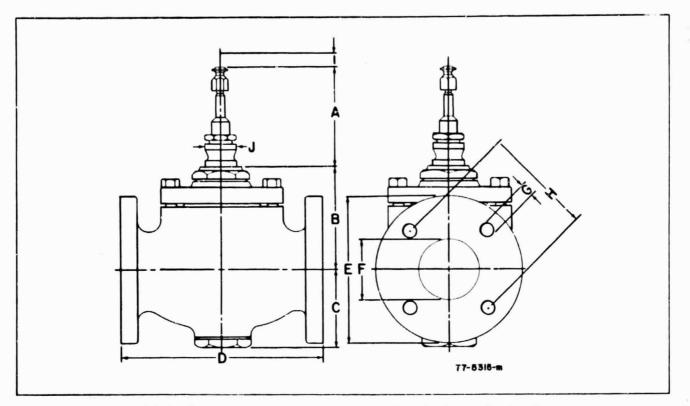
V5011A & D FLANGED BODY DIMENSIONS (REFER TO TABLES 5 AND 6)
